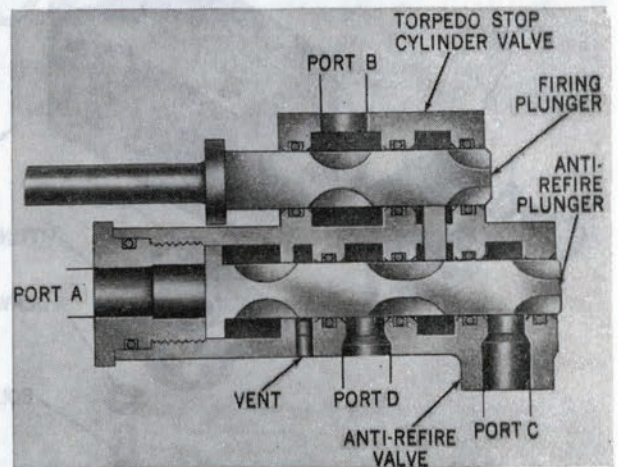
Torpedo Stop Cylinder and Anti-Refire Valve—Sectional View.
